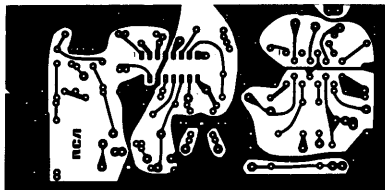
Suggested PC-board pattern and parts layout for the circuit of Fig. 14.
